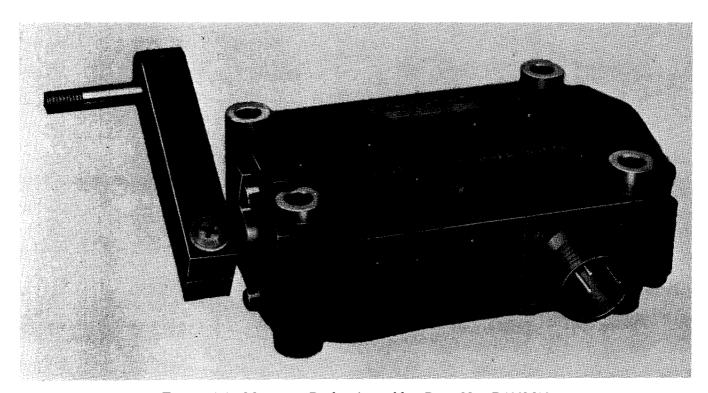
Magnetic Brake Assembly, Part No. R460M10.
